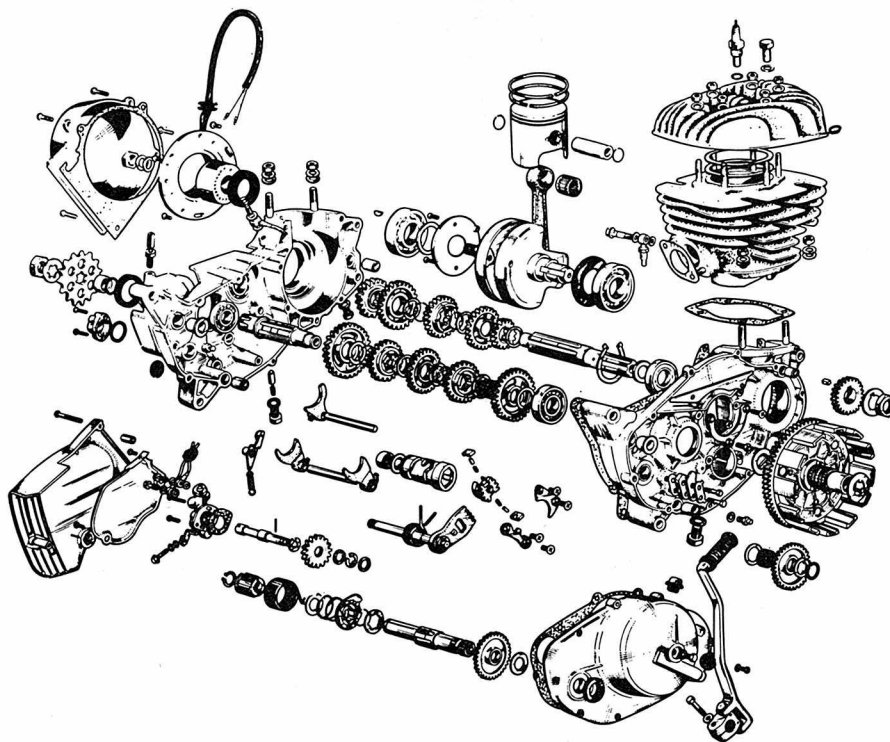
Exploded view of Suzuki TM400R Cyclone engine and transmission assembly.
